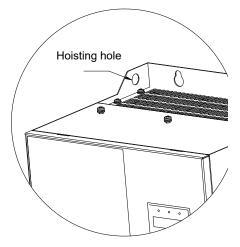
Hoisting Diagram of Sheet Metal Structure
